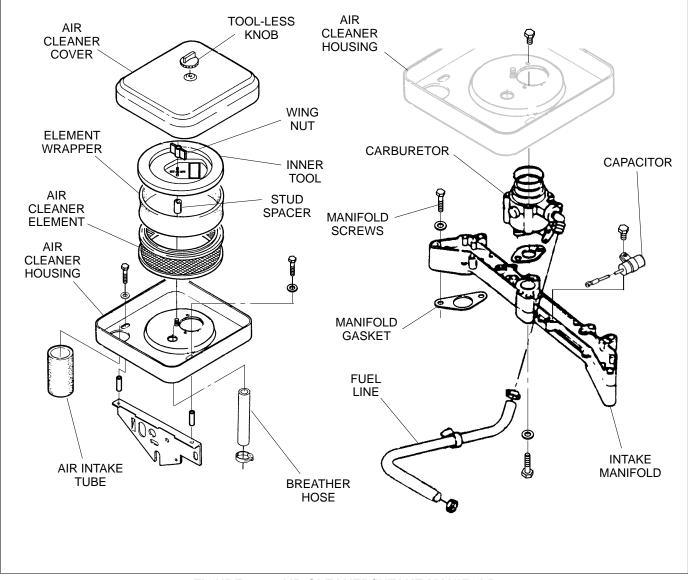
AIR CLEANER/INTAKE MANIFOLD
